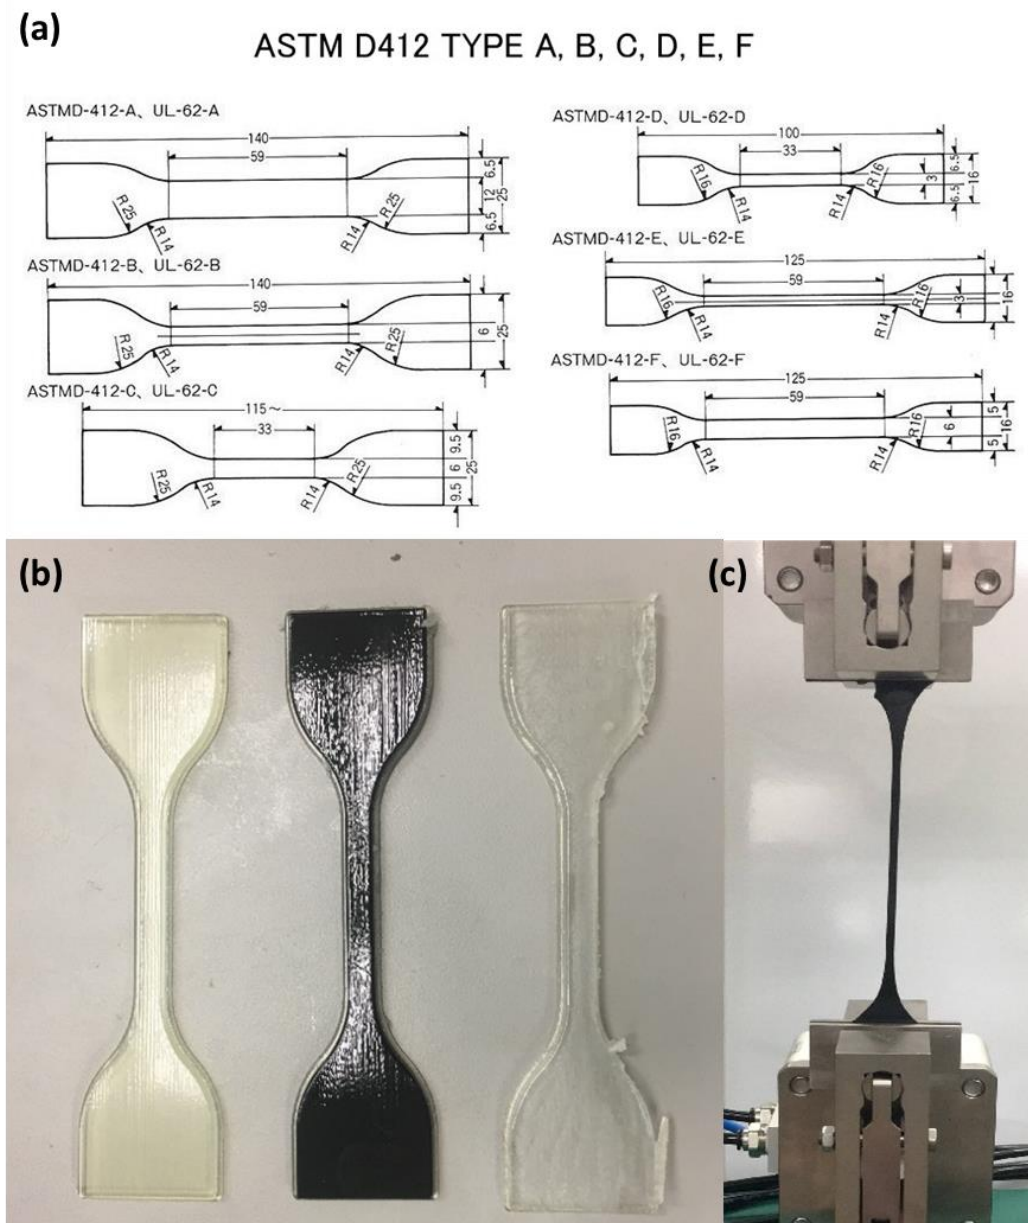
ASTM D412 standard for testing vulcanized rubber and thermoplastic elastomers. (a) Six types of dumbbell shape specimen in ASTM D412 standard are shown with their corresponding dimensions. (b) 3D-printed dumbbell-shaped specimens of AgilusClear30™ (left), TangoBlackPlus™ (middle), and MED610™ (right). (c) Uniaxial tensile test for TangoBlackPlus™ with 150% elongation before breakage.
